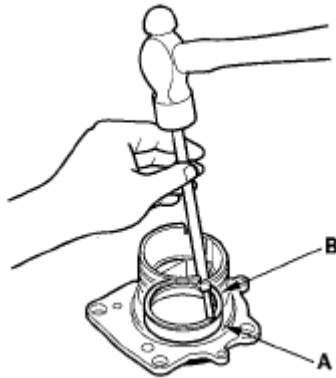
Removing Tapered Roller Bearing Outer Race And Thrust Shim
